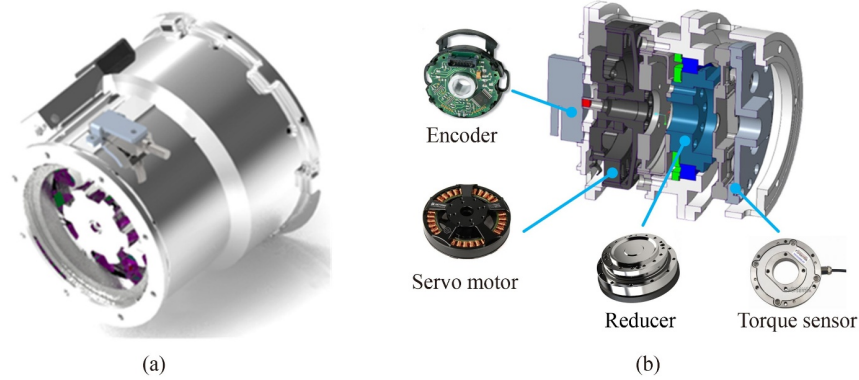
Design of the integrated drive unit: (a) three-dimensional and (b) inner structure.
